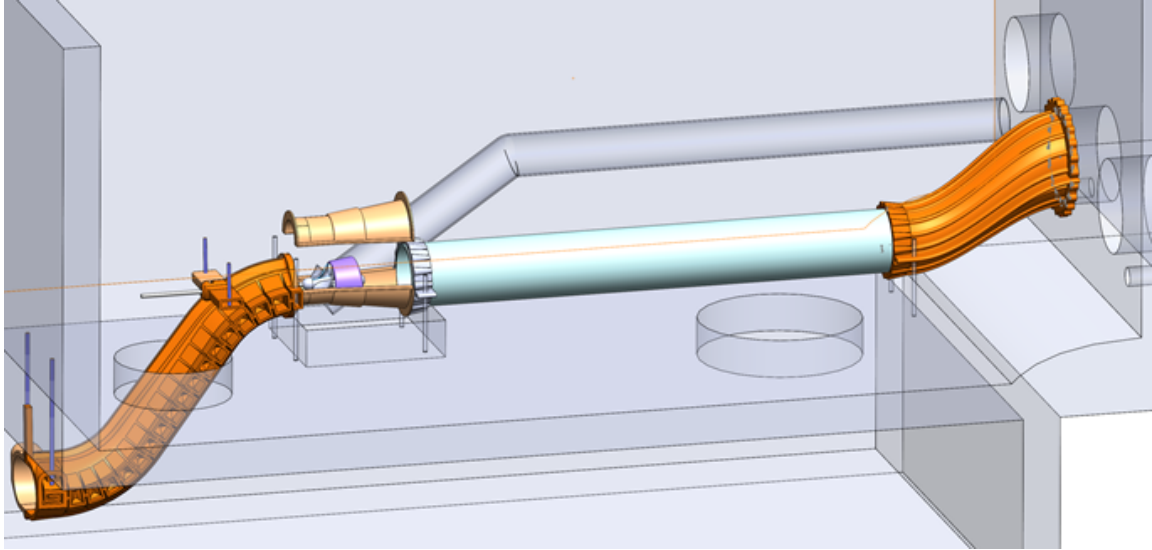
The CAD model of the hydropower assembly. The draft tube with external support structures is located on far left of the image.
